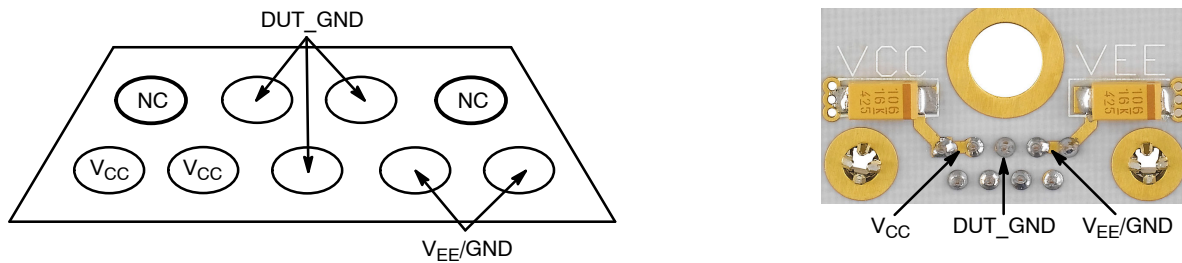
Power Supply Connector – 9 Pin Side View (Left) and PCB Top View (Right)
